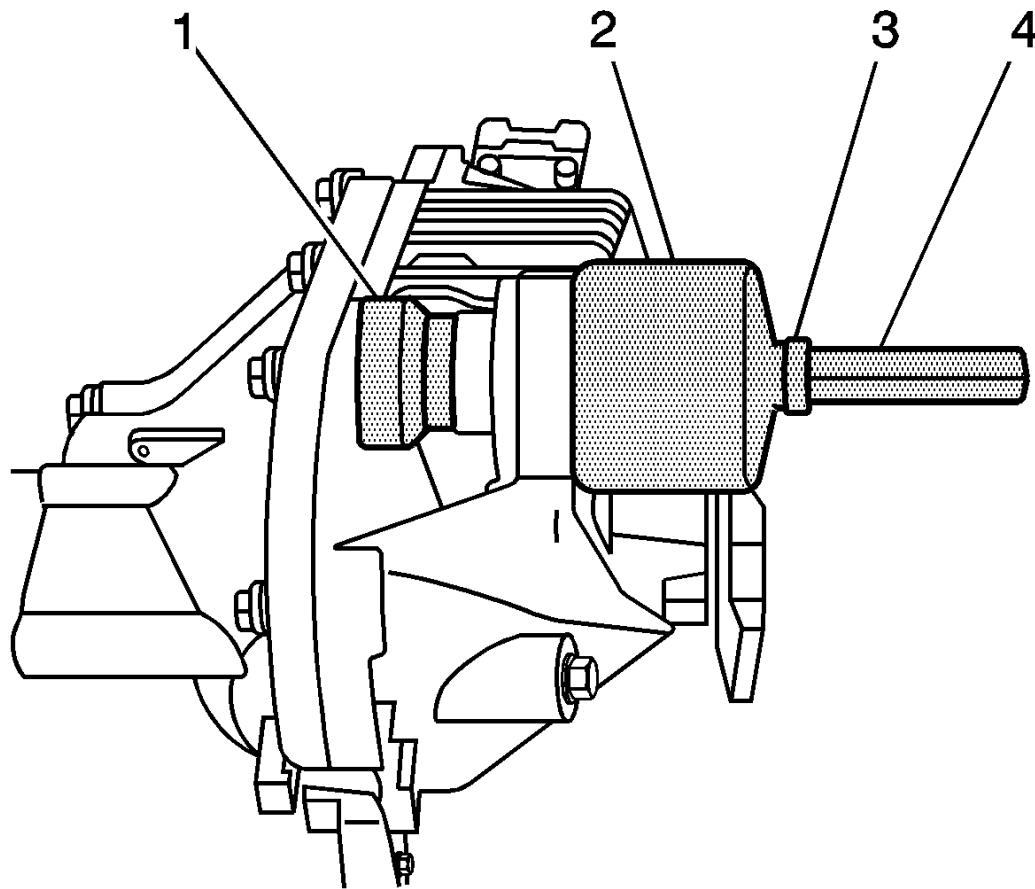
Upper Differential Carrier Assembly Bushing And Special Tool
